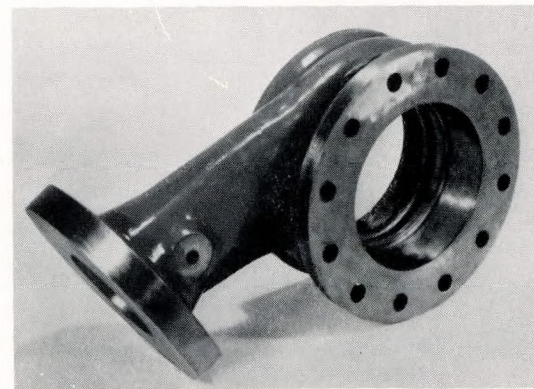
S.G. iron casing of single-stage turbo feed pump; capacity 20,000 gal. per hr.; working pressure 325lb. per sq. in.
